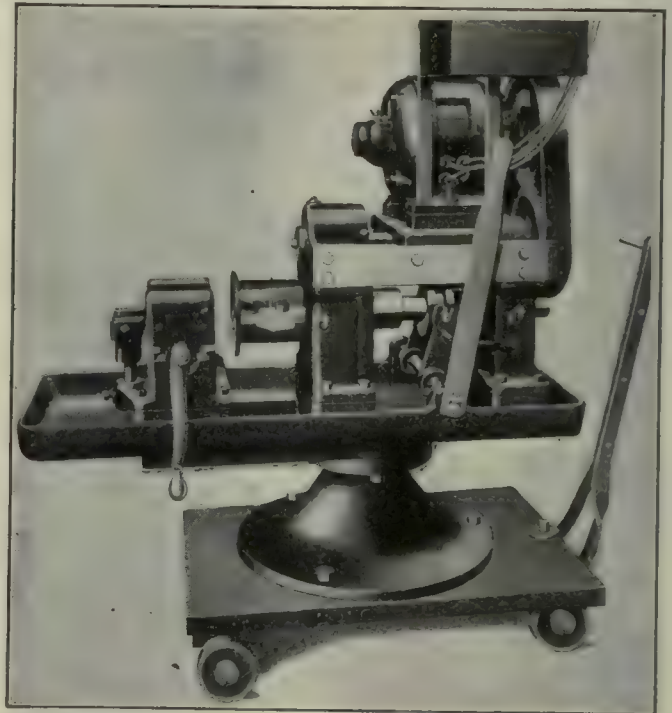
FRONT VIEW OF MICRO TAPER TURNING TOOL
